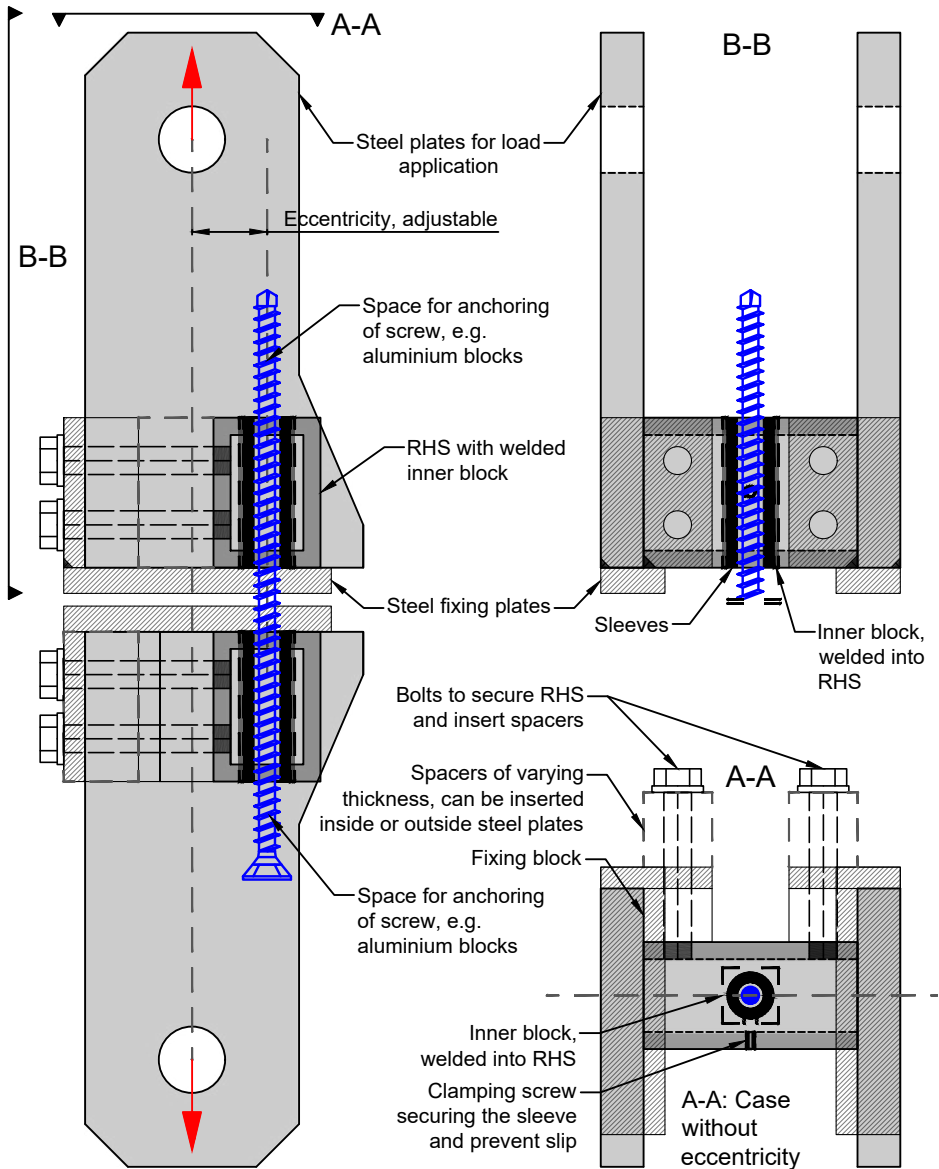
Schematic illustration of a possible test setup with individual components for combined bending moment and normal force in a screw. Side view on the left exemplarily with maximum eccentricity, section view A-A shows setup without eccentricity.
